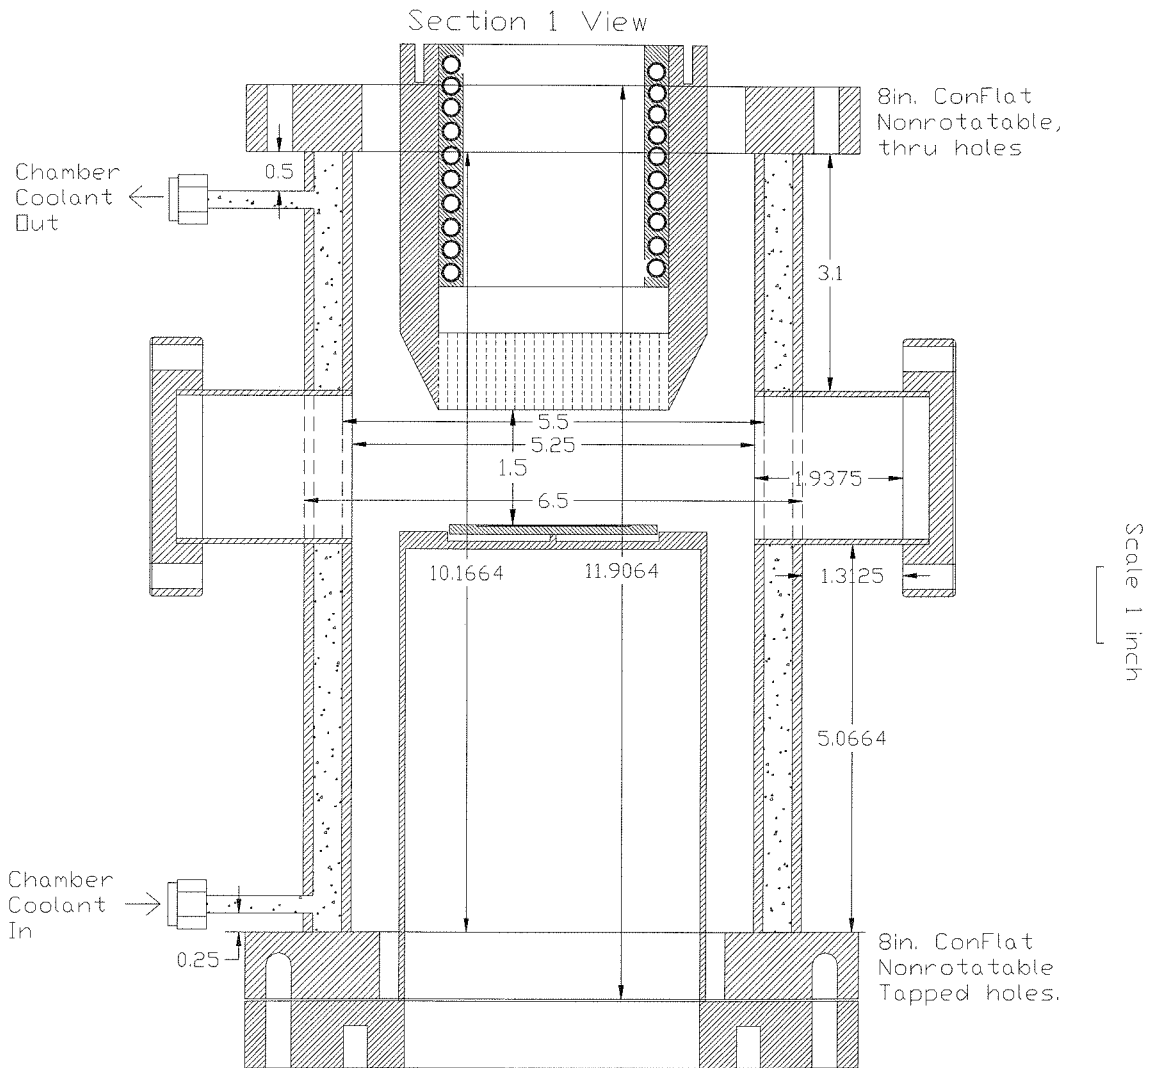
Cross-sectional view through the straight-through viewports of the chamber body, inonel can, and copper portion of the showerhead.
